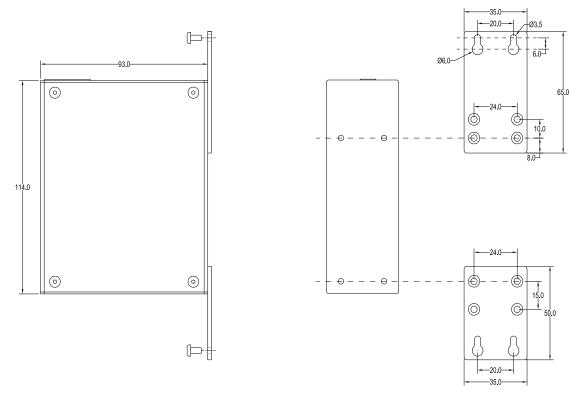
Side View + Back View + Installation Kit of Wall Mounted from the Back
